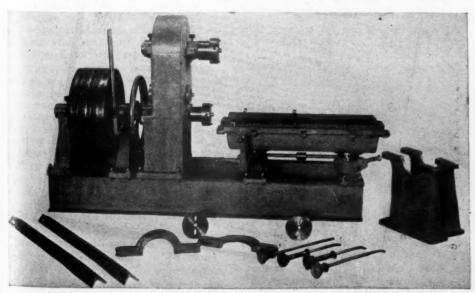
Another type of universal stand designed for all sizes of engines. Burning-in is done with the geared down upper shaft and running-in with the direct connected lower one.
